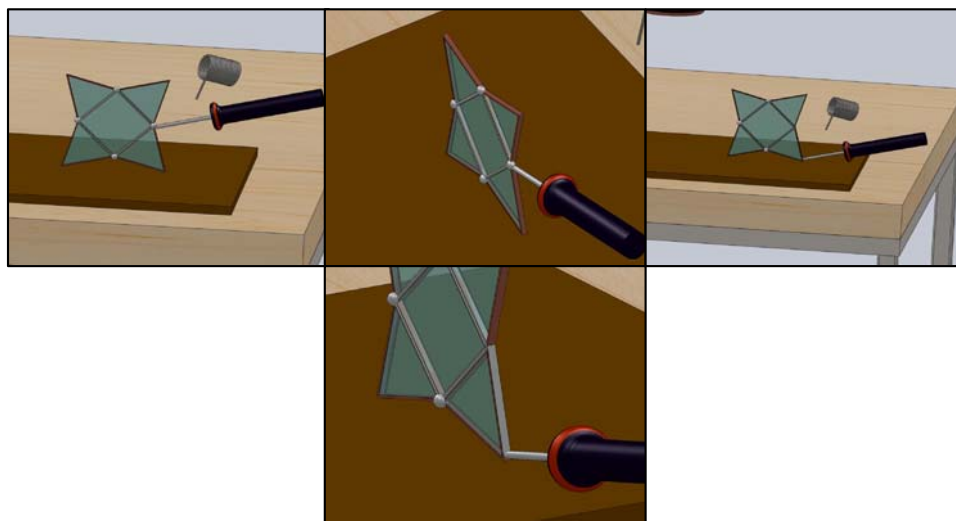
Use the soldering iron to guide the extra globs of solder to the edges of the piece for tinning
